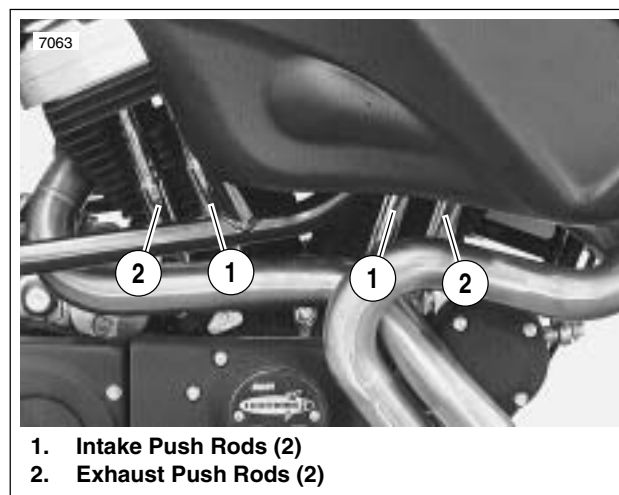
Push Rod Locations (Shown on Assembled Engine)
